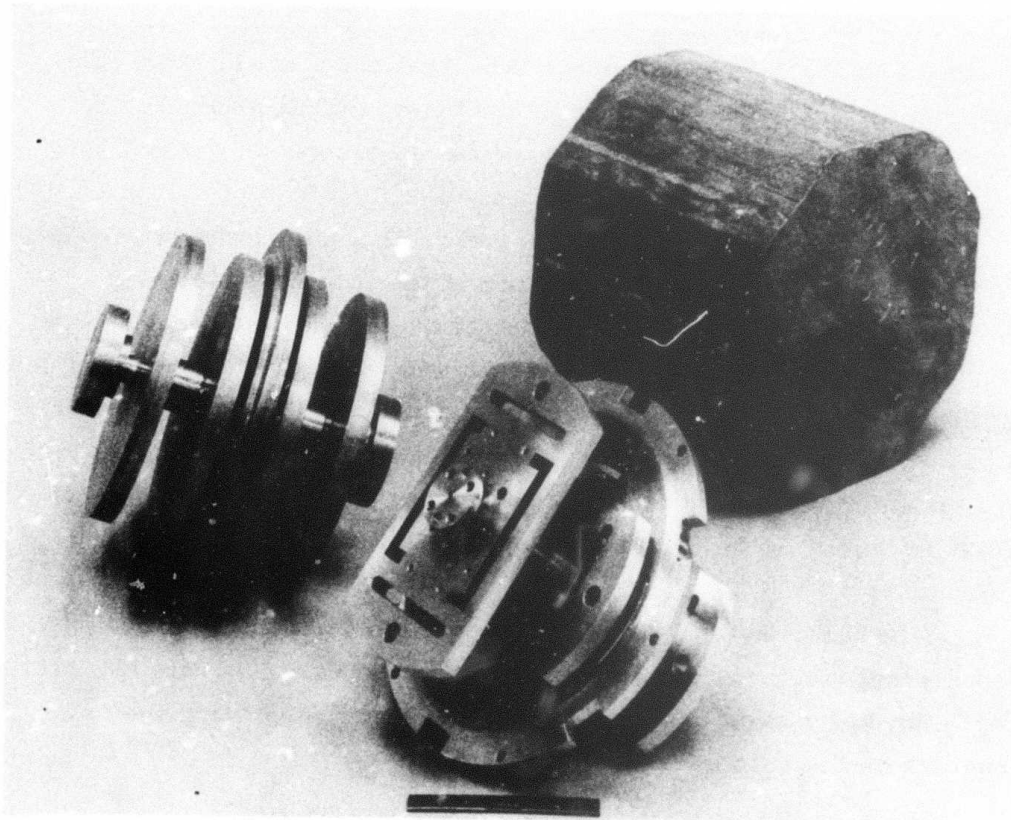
Unitized arm/pivot machining sequence.
